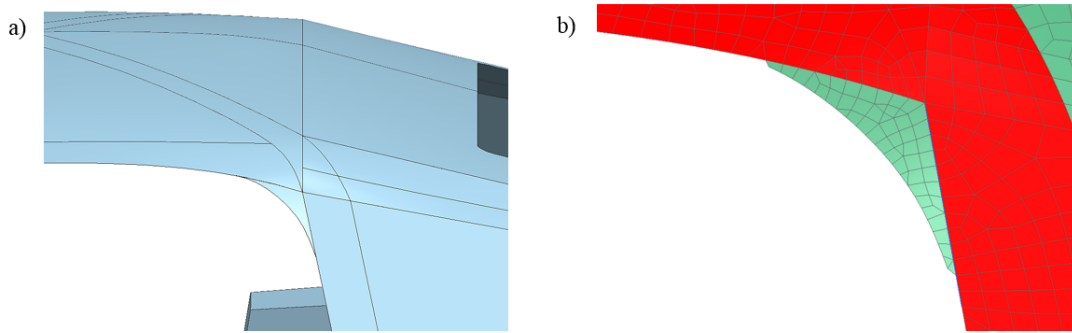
Roof refinement: a) structural adjustment, b) mesh.
